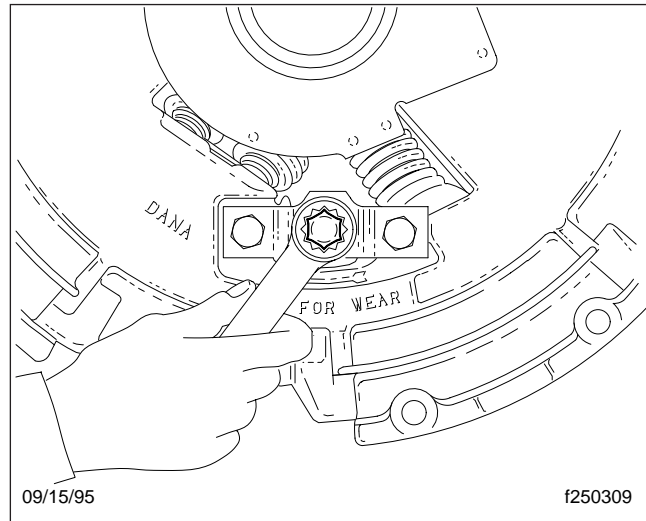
, Adjustment with Kwik-Adjust (bell housing shown removed)
